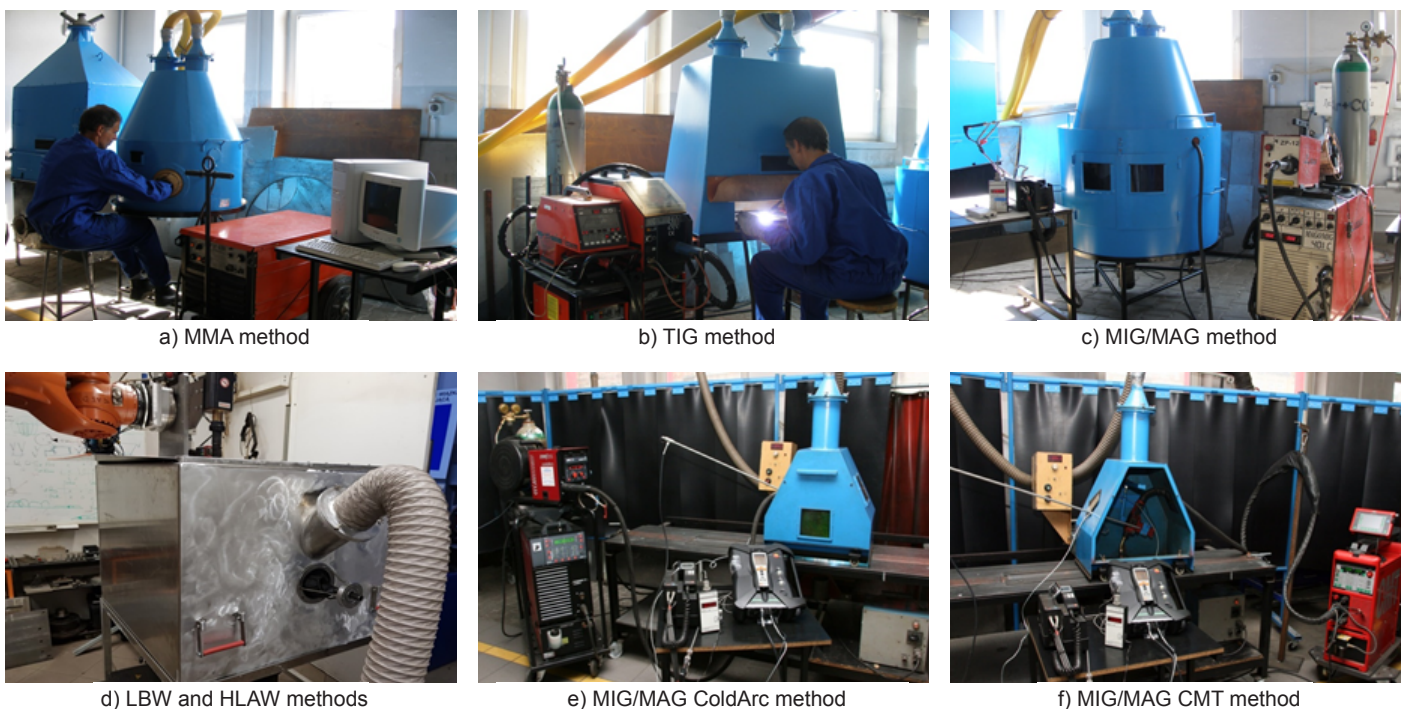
Test rigs used in measurements concerning the emission of welding fumes in relation to various welding method used to weld stainless steel 1.4301
